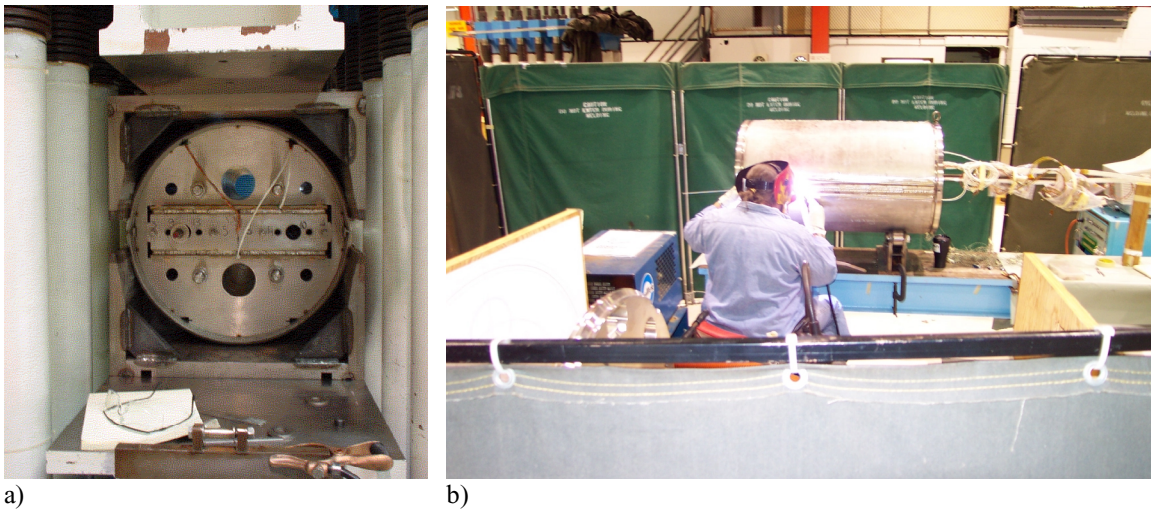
Skin welding inside (a) and outside (b) of the press.
